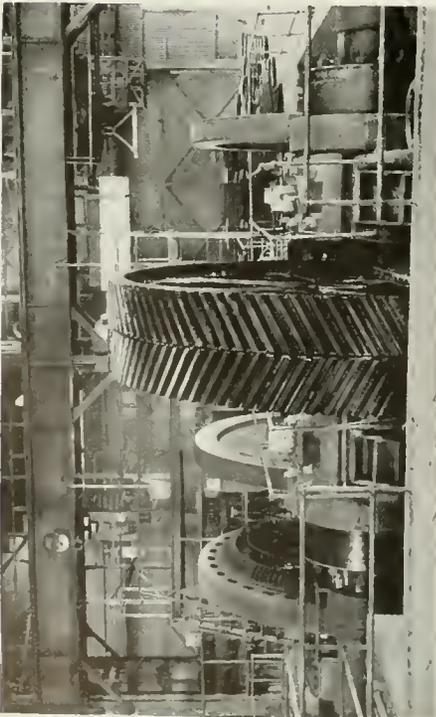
1400-h.p., 240-r.p.m. Motor and Control with Flywheels and Gear Driving 28-in. Sheet Mill
